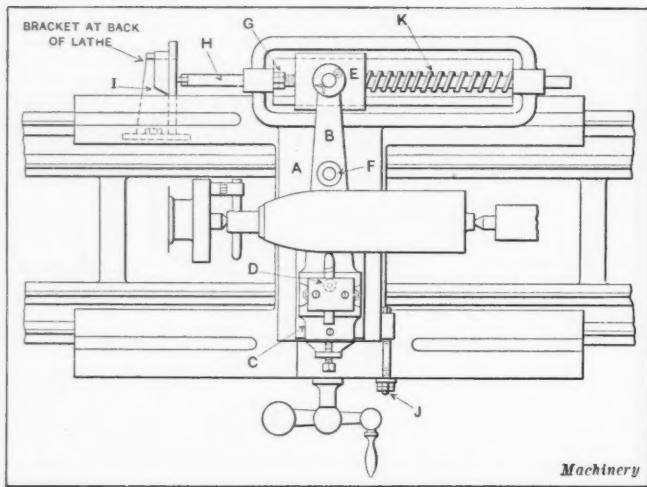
Shell Turning Attachment with Tool working on Wall of Shell
